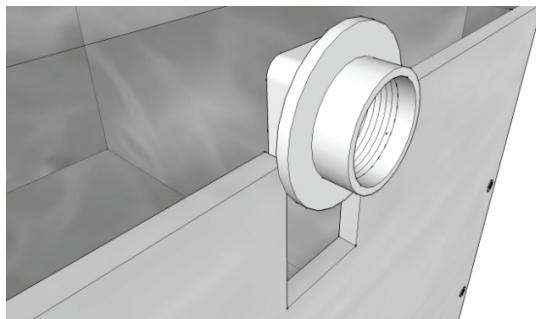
Liner fittings slide into Part B notches so that when seated, the fittings will not turn.
